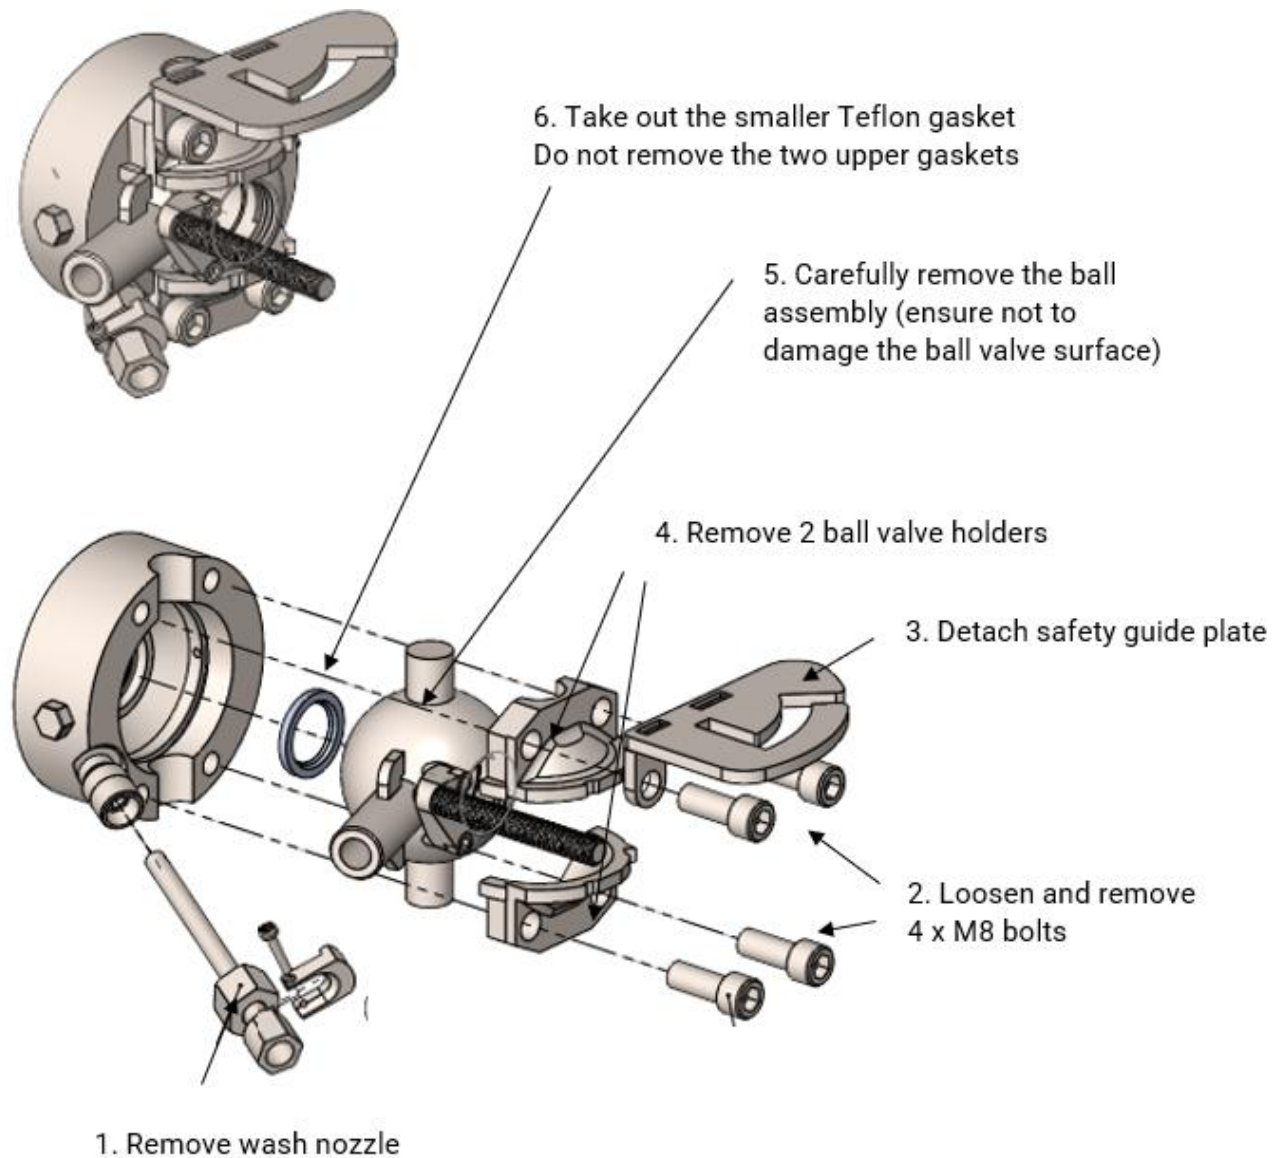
Disassembling the PASVE® valve components from the valve body (Drawing 10724).
